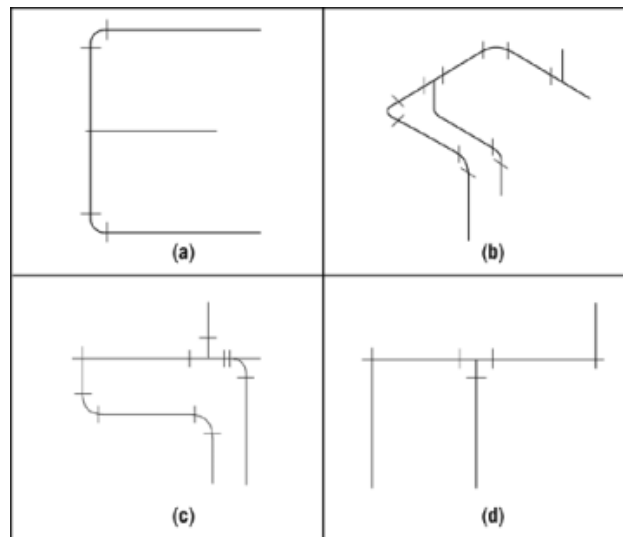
Split screen viewing of designed parts. (a), Top view; (b), isometric view; (c), front view; (d), right-side view.
